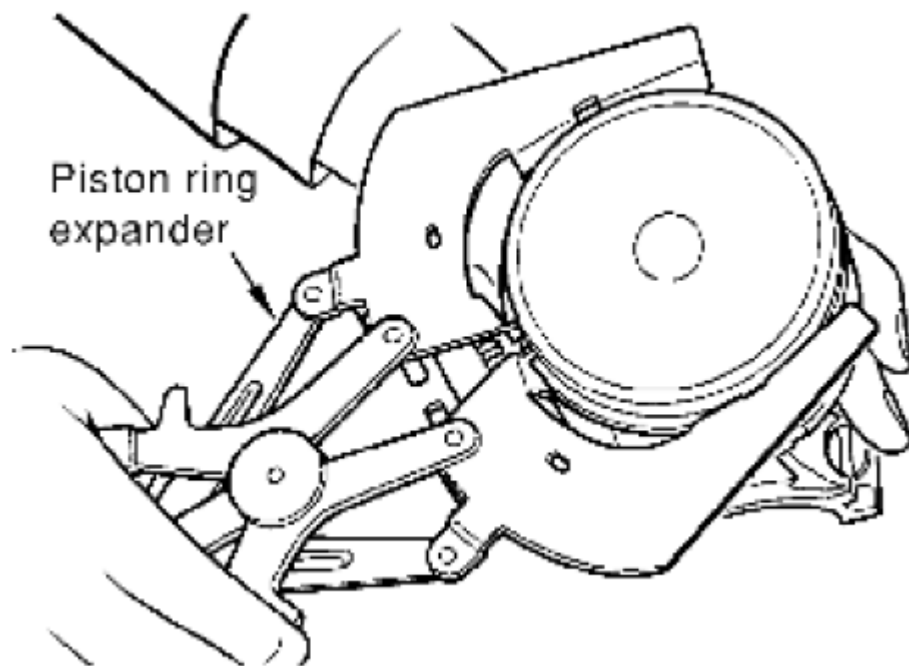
Installing Piston Rings Using Piston Ring Expander Or Suitable Tool
